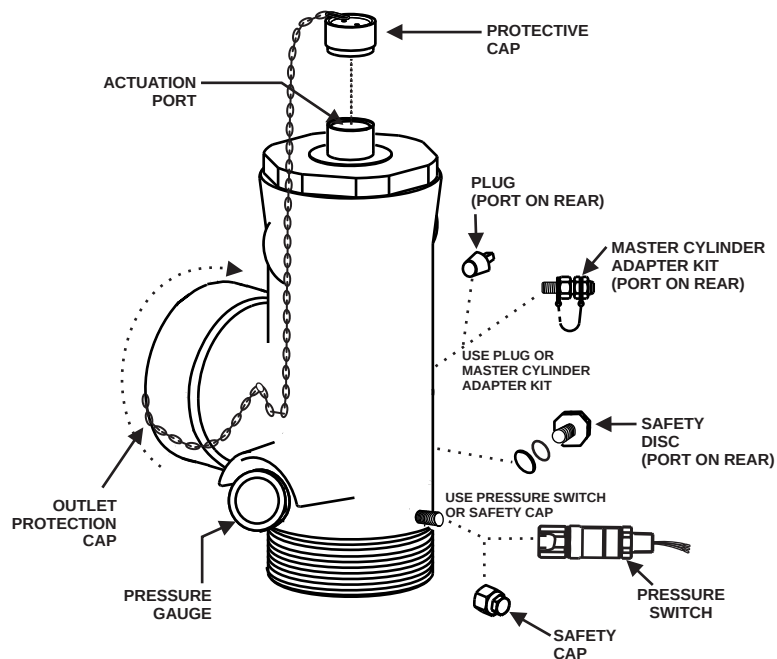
1½ in. and 2 in. Valve General Arrangement
